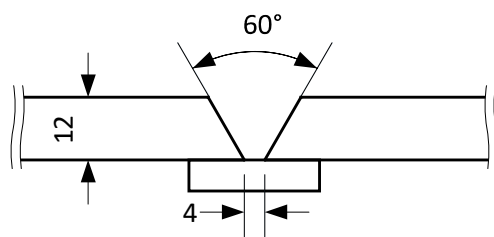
Test piece of multi-layer groove welding.
